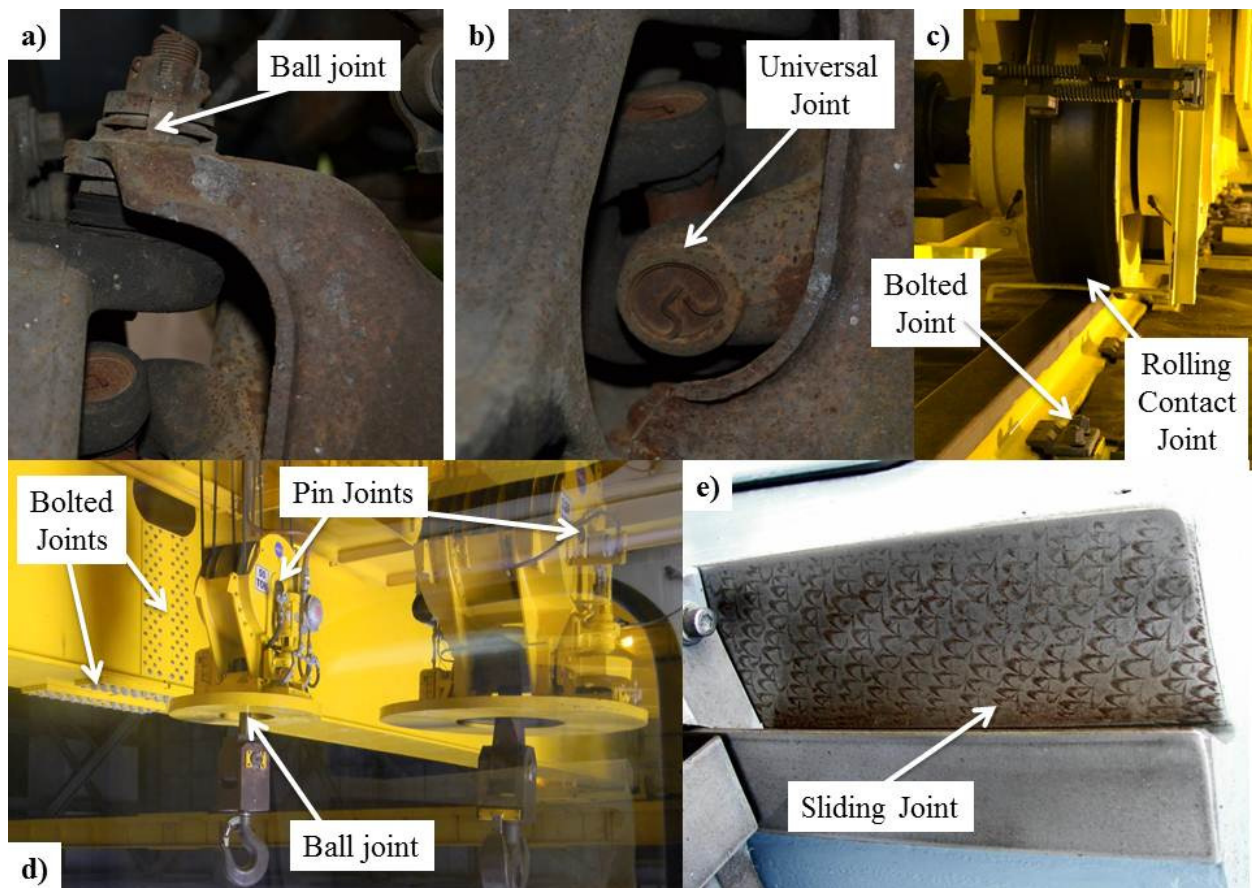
Examples of different types of mechanical joints: (a) a ball joint from the front axle of an automobile¹²; (b) a universal joint connecting the wheel to the driveshaft²; (c) one of the train wheels and railroad track, a rolling contact joint, supporting the crane in (d) [9, 10]; (d) the 325 ton main hoist and 50 ton backup hoist, used to stack the Saturn V and Space Shuttle
